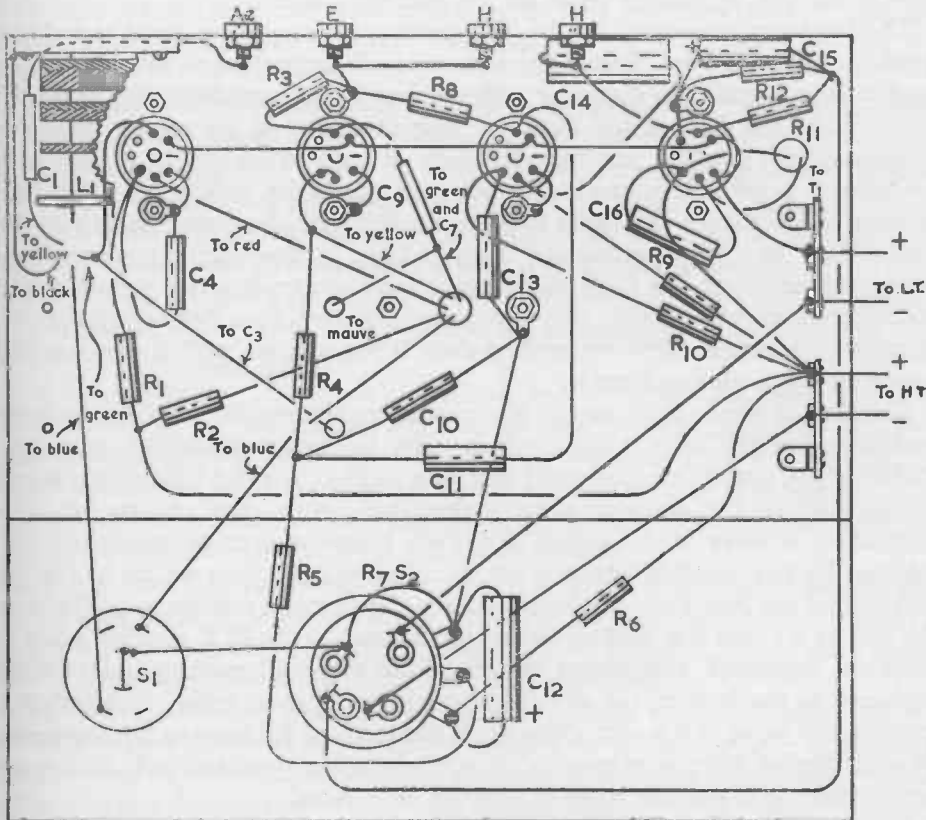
UNDER-CHASSIS VIEW OF THE FOUR-VALVE RECEIVER.
